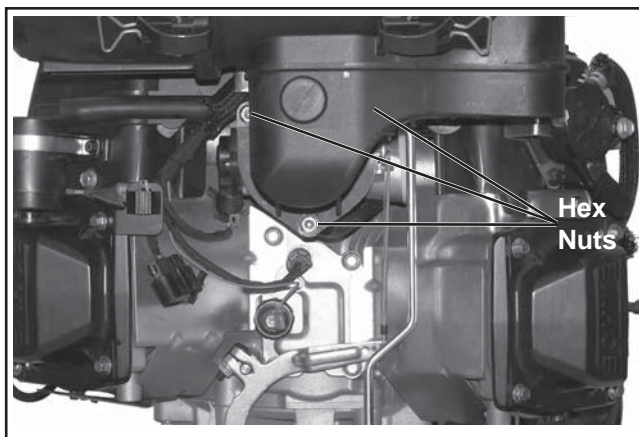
Remove Hex Nuts (one is hidden behind the elbow).
